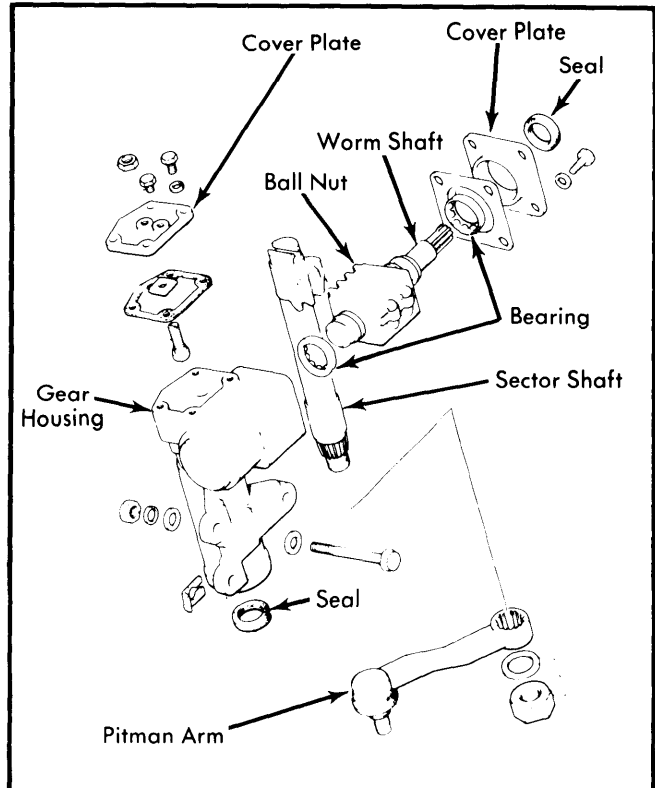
Exploded View of B2000 Recirculating Ball Steering Gear (Others Similar)
